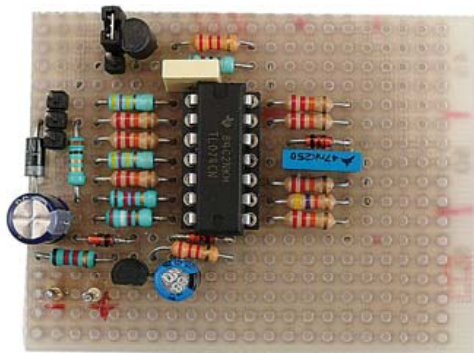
The Elektor lab prototype, assembled on a piece of prototyping board.
